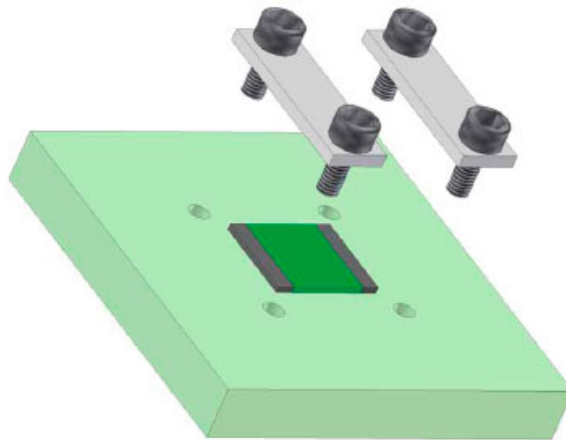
Thick-film resistor assembly (Courtesy of Alexander Walzenbach).
